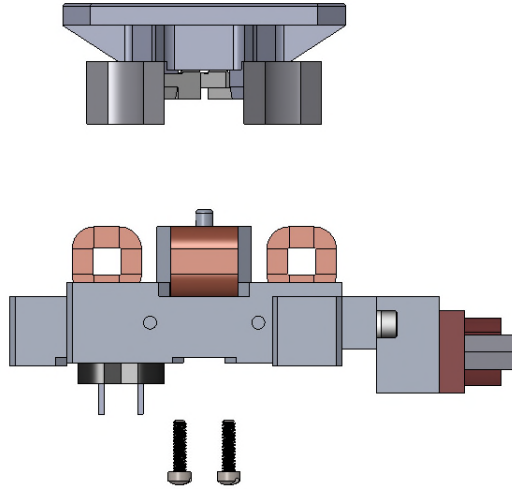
Moving Mirror Subassembly and Baseplate Assembly Integration
